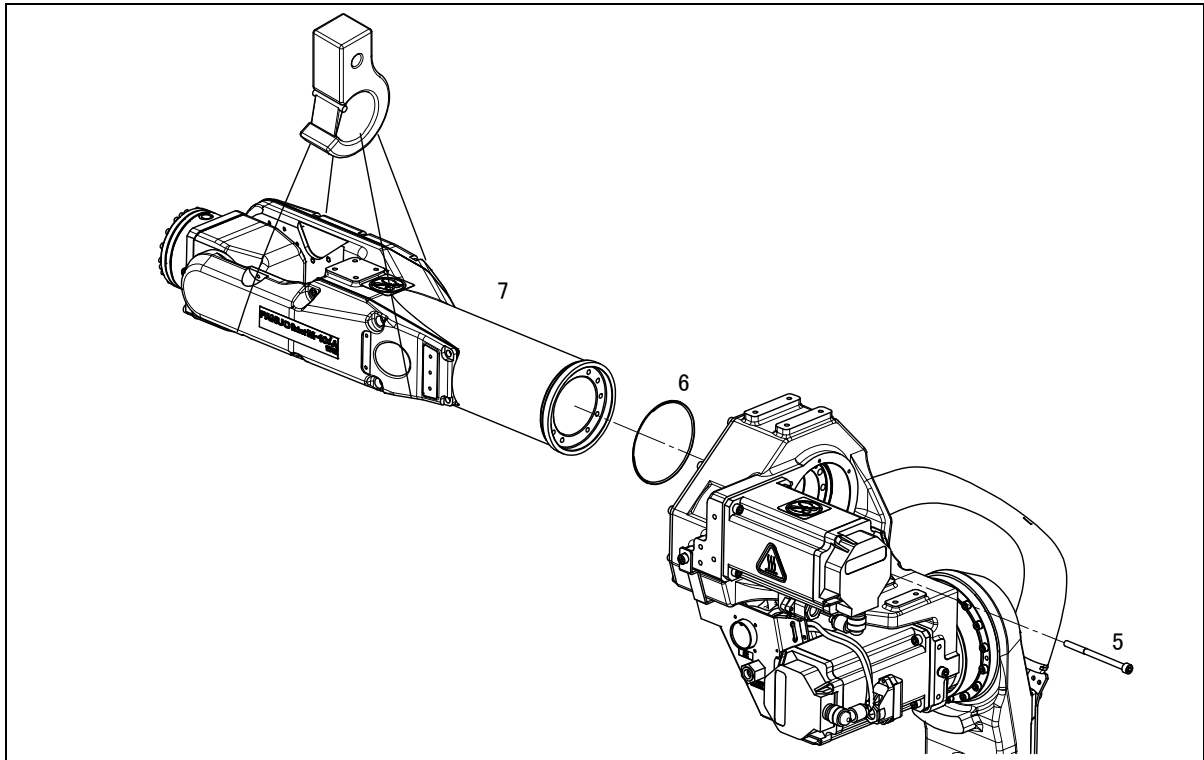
(b) Replacing the J4-axis gearbox unit
